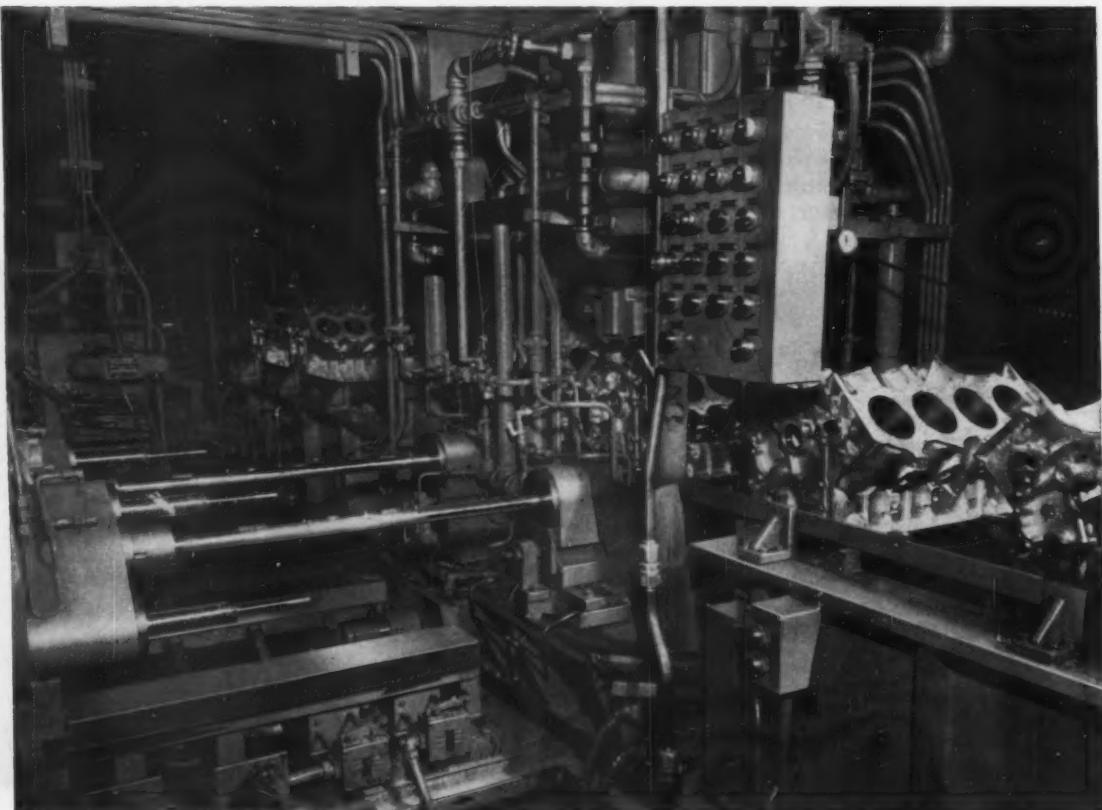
Special grind on cutting bits line-bores camshaft bearing seats in this Ex-Cell-O machine formerly used on cast iron.
